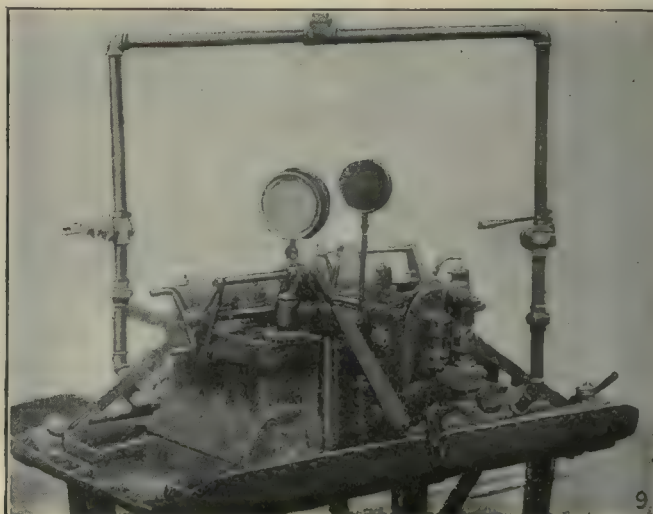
DOUBLE FIXTURE FOR WATER-TESTING
